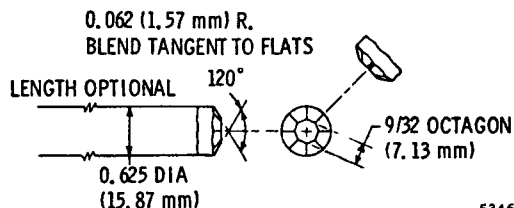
Swaging tool for six-pinion, low-range pinion spindles
